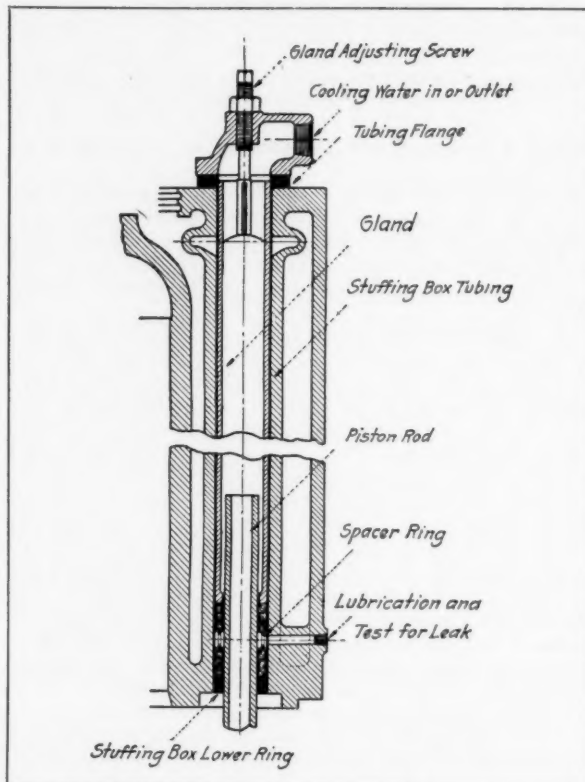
A LARGE SECTION OF STUFFING BOX FOR PISTON-COOLING ARRANGEMENT, MANNING, MAXWELL & MOORE MARINE DIESEL ENGINE
